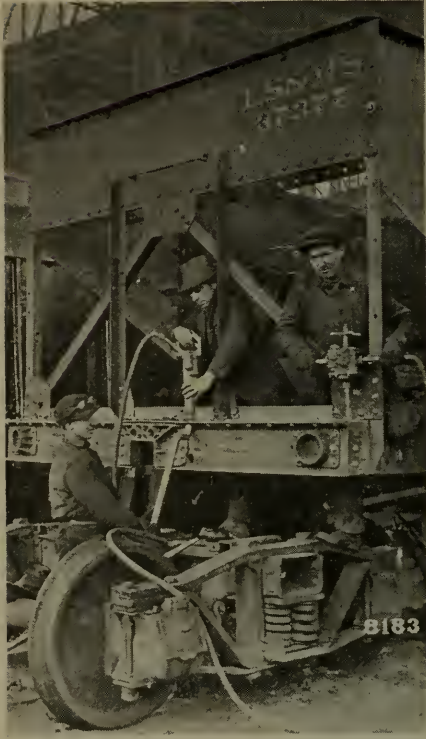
Driving $\frac{3}{8}$ -inch rivets cold in end piece of coal car.
